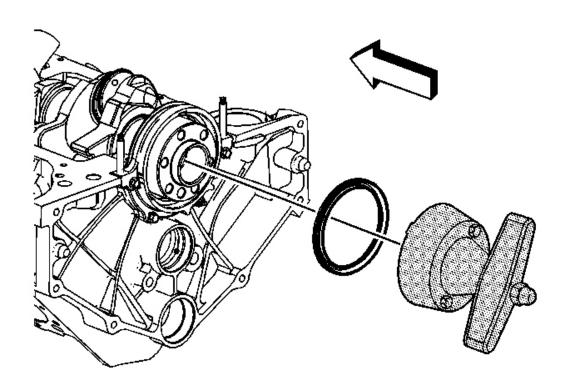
Identifying Crankshaft Rear Oil Seal Courtesy of GENERAL MOTORS CORP.
